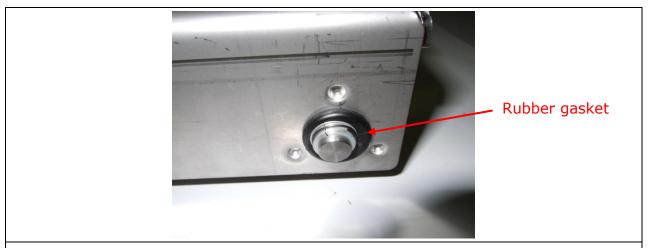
Step 2 is to press out the 4 rubber gaskets with a blunt tool and finally to remove the carrier plate
